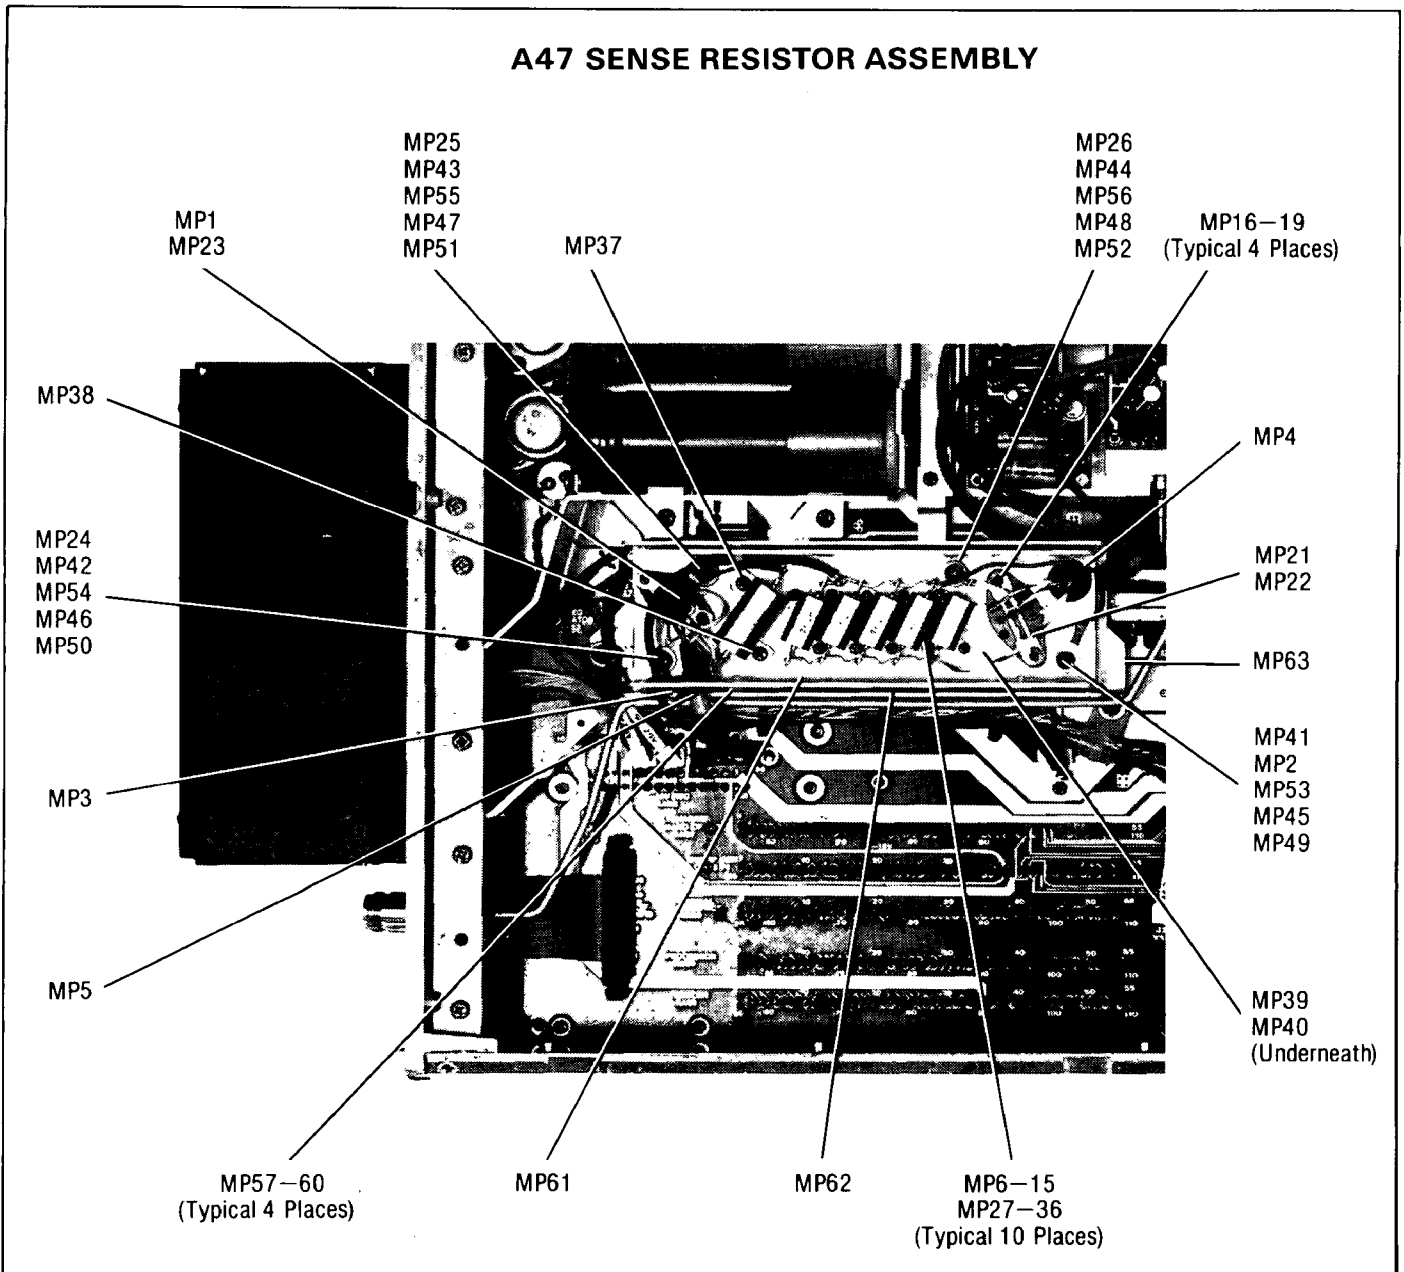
A47 Sense Resistor Assembly Mechanical Parts Location
